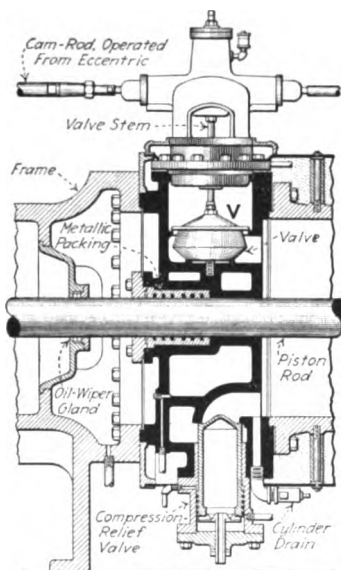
Detail of poppet-valve mechanism on head end of Chuse uniflow engine.
